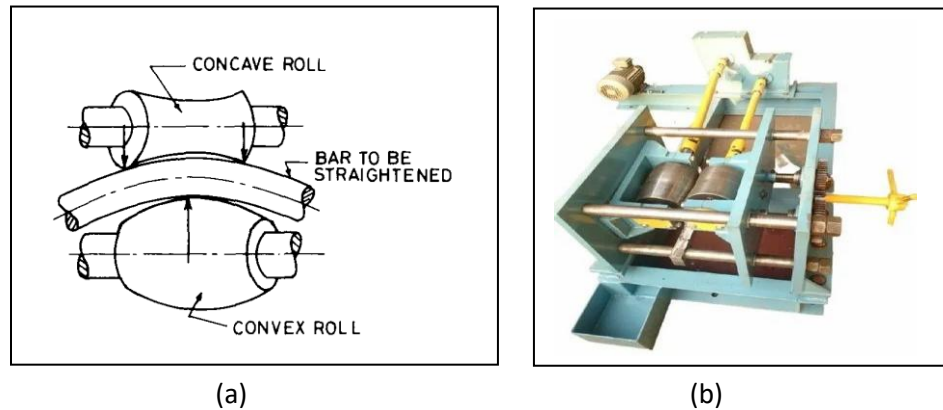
(a) Sketch [8] and (b) Photograph of Straightening of Bar in a Two-Roll “Air-Bend” Machine [82].
